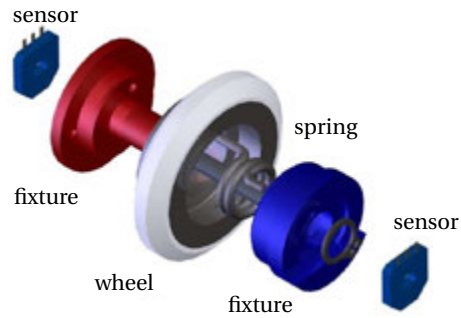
Assembly drawing of spring mounted in wheel - *image from [104]
